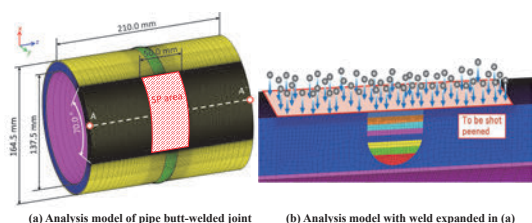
FEM analysis model of SUS316L austenite stainless steel pipe butt-welded joint.
